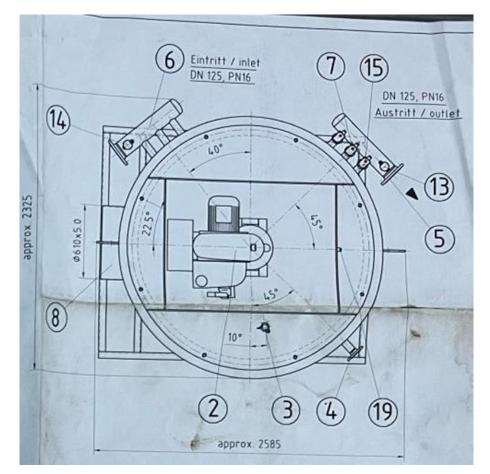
Connection of the Boiler Cover to the Boiler Body with 8 M16 Bolts and Cover Dimensions
